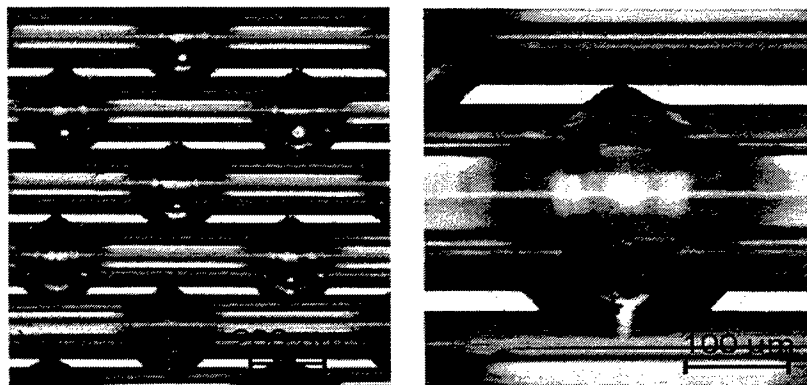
Part of an optical fiber array (view on top side without cover plate)
